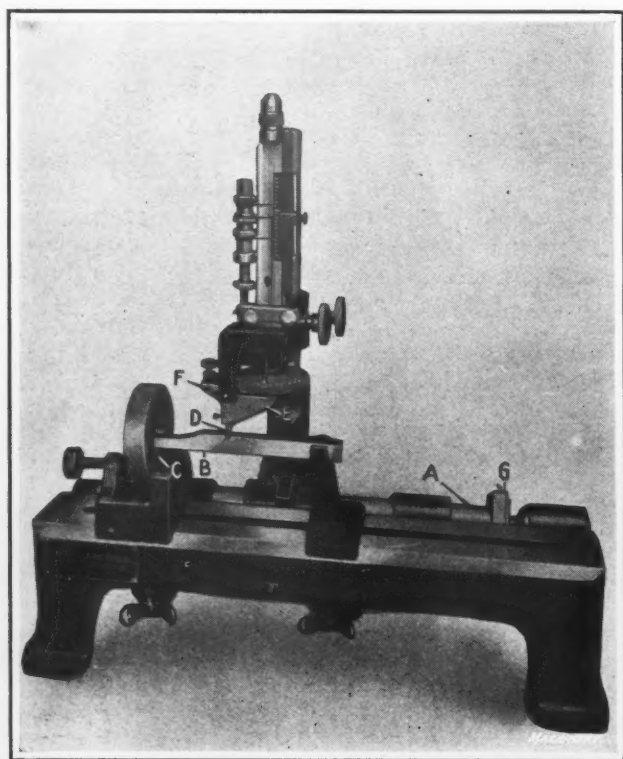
Blair Thread Lead Testing Machine shown measuring Lead of Female Thread Gage
